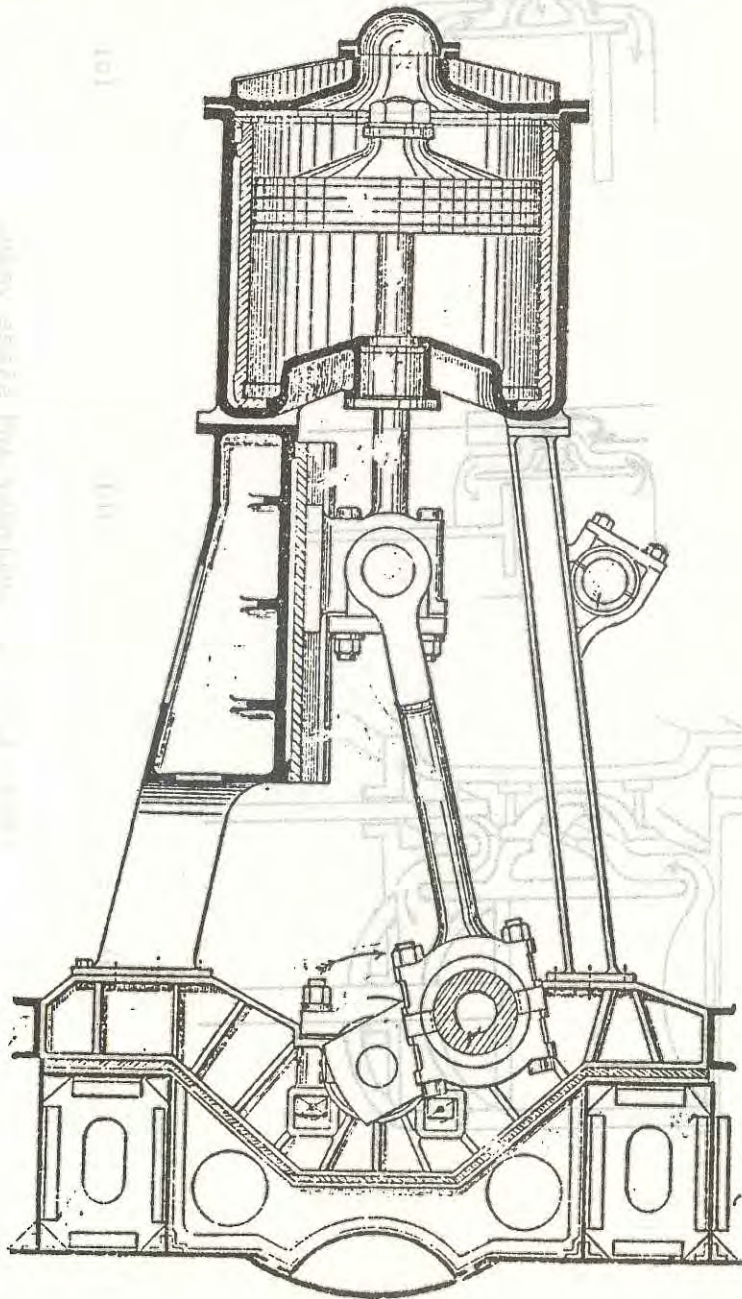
1 Cutaway view of a reciprocating engine
